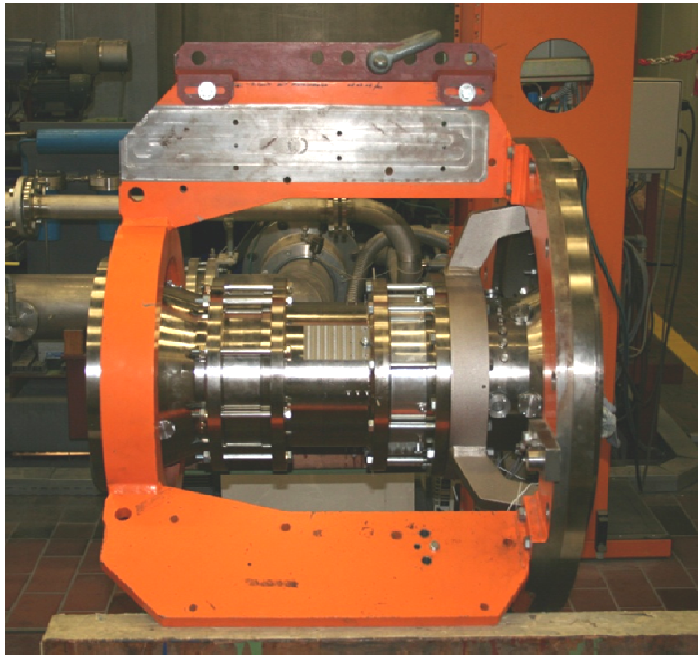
Finished Assembly of the Axial Compressor Configuration.
